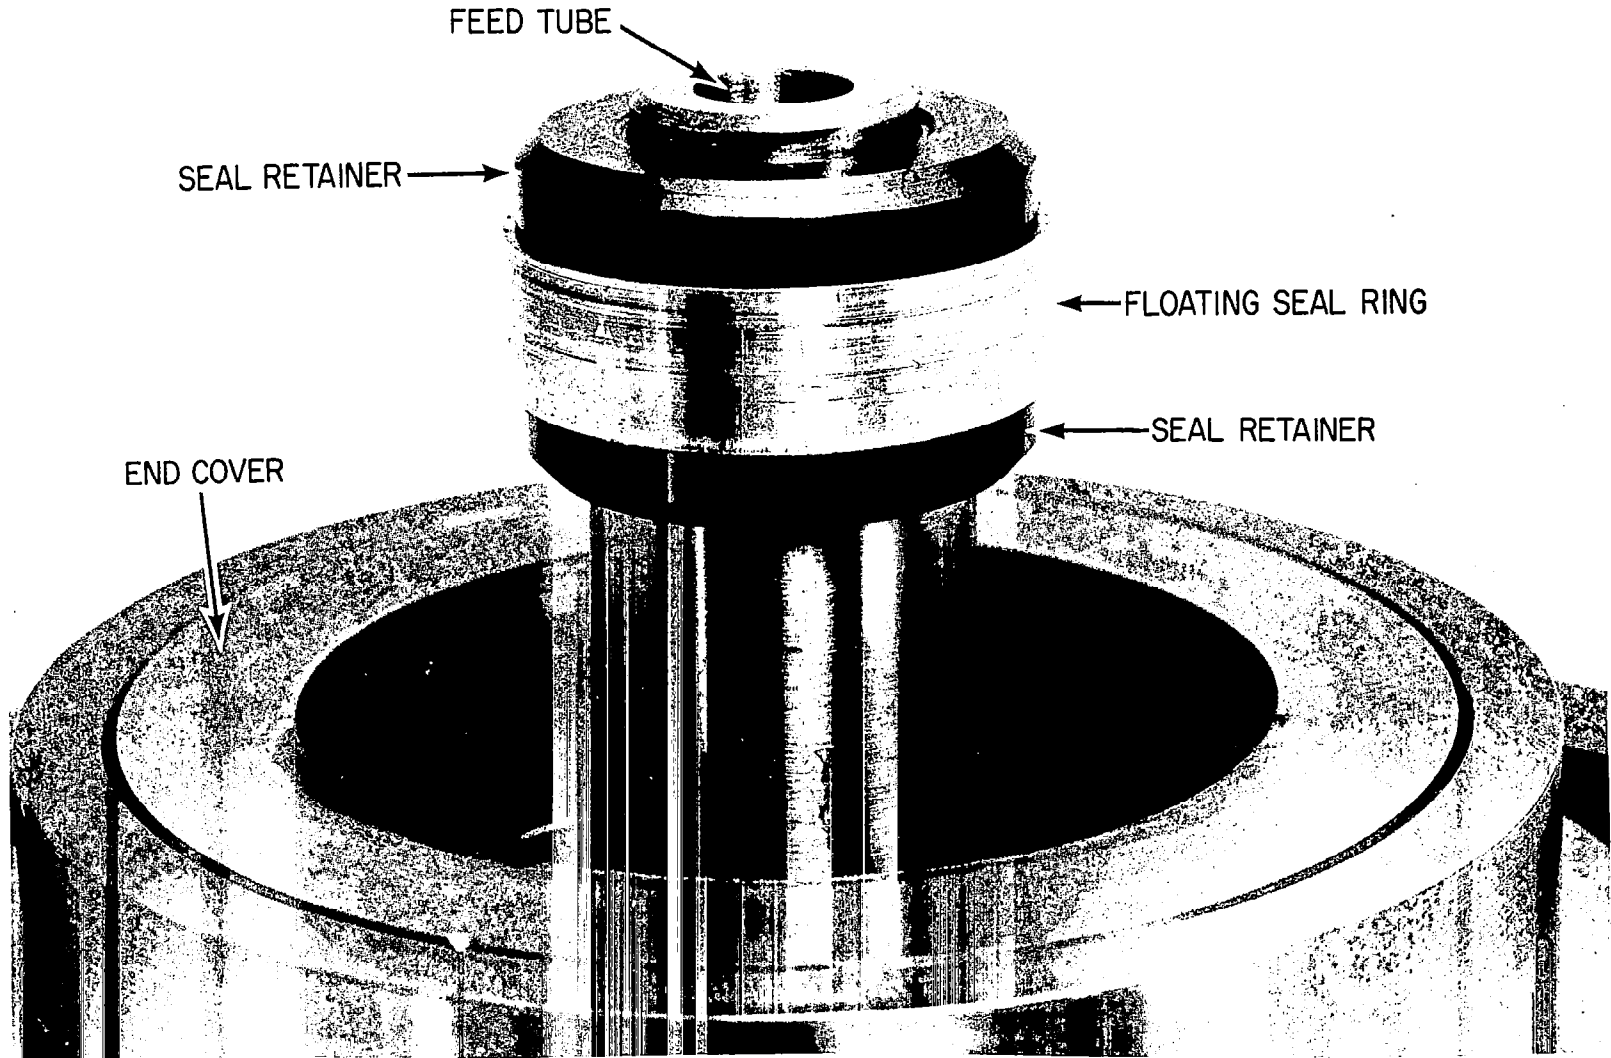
Redesigned Oil Feed Pipe with Floating Ring Seal
